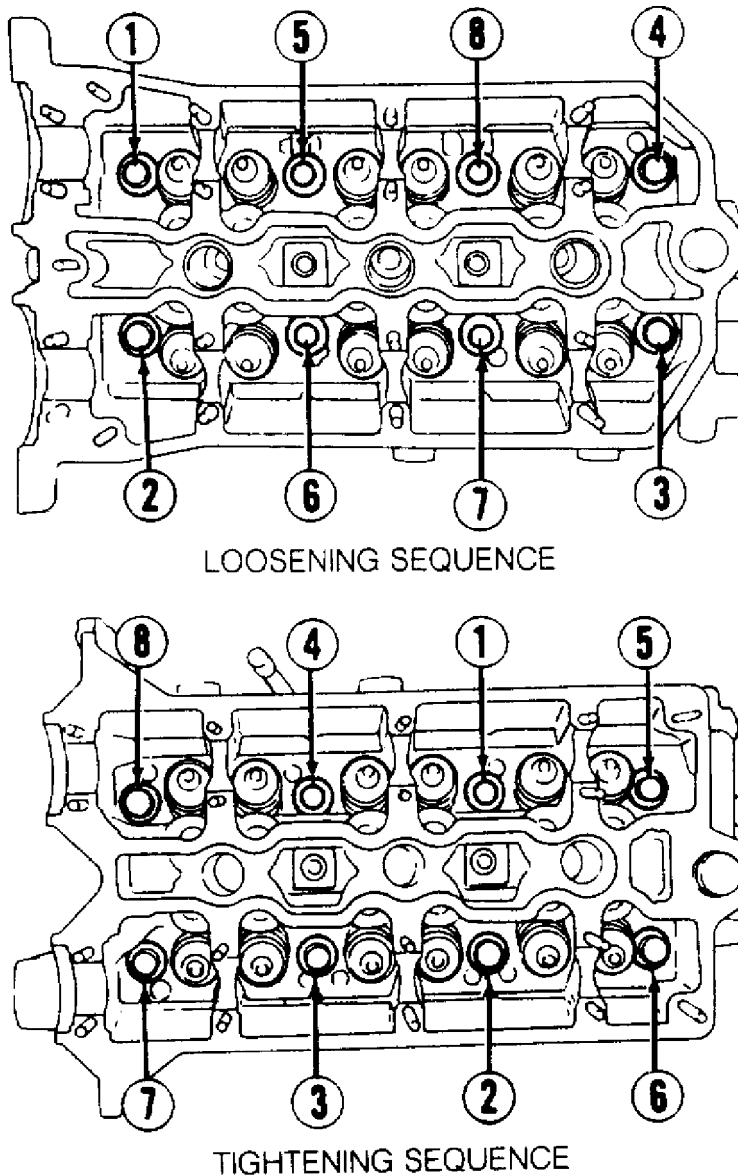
Camshaft Bearing Cap Bolt Loosening & Tightening Sequence
